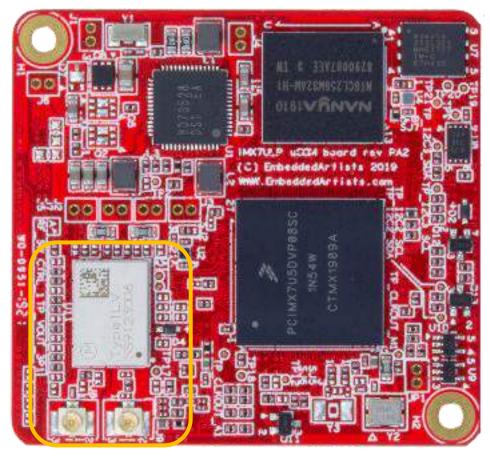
1LV Wi-Fi/BT Module Mounted on iMX7ULP uCOM Board
